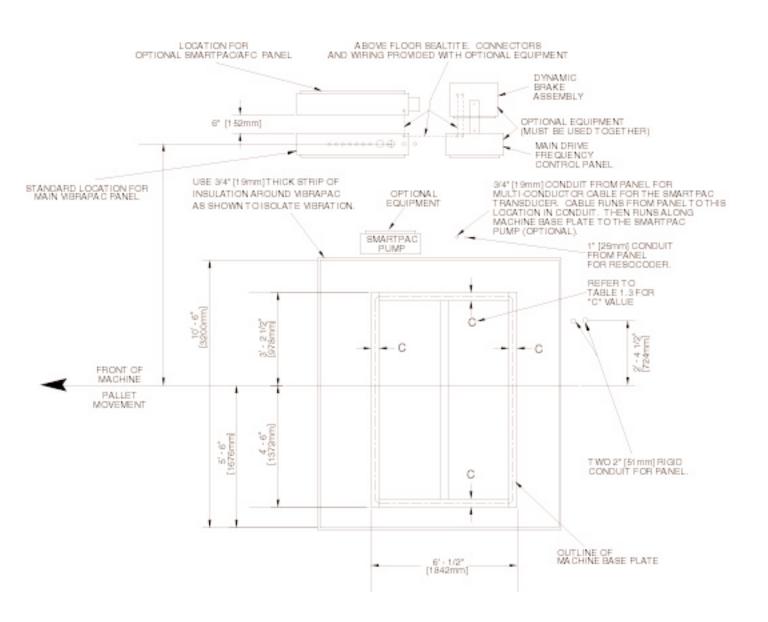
TOP VIEW (PALLET ENTRANCE ON RIGHT HAND SIDE OF MACHINE).
